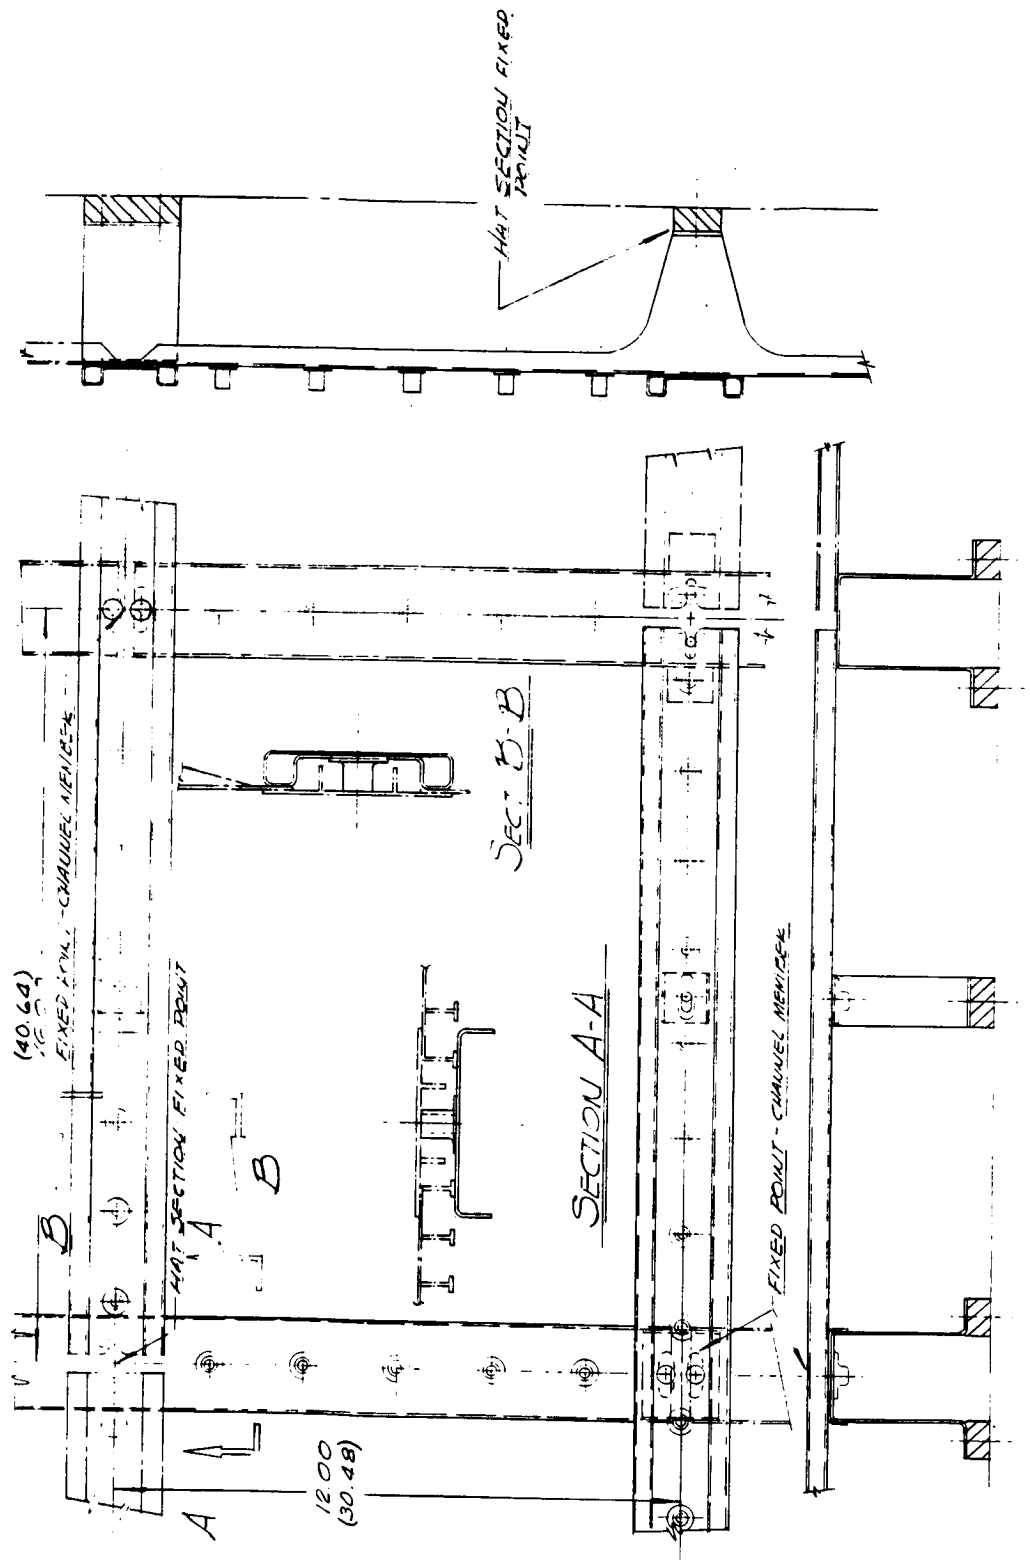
Hat Section/Cantilevered Channel Support Structure Concept (Preliminary)
